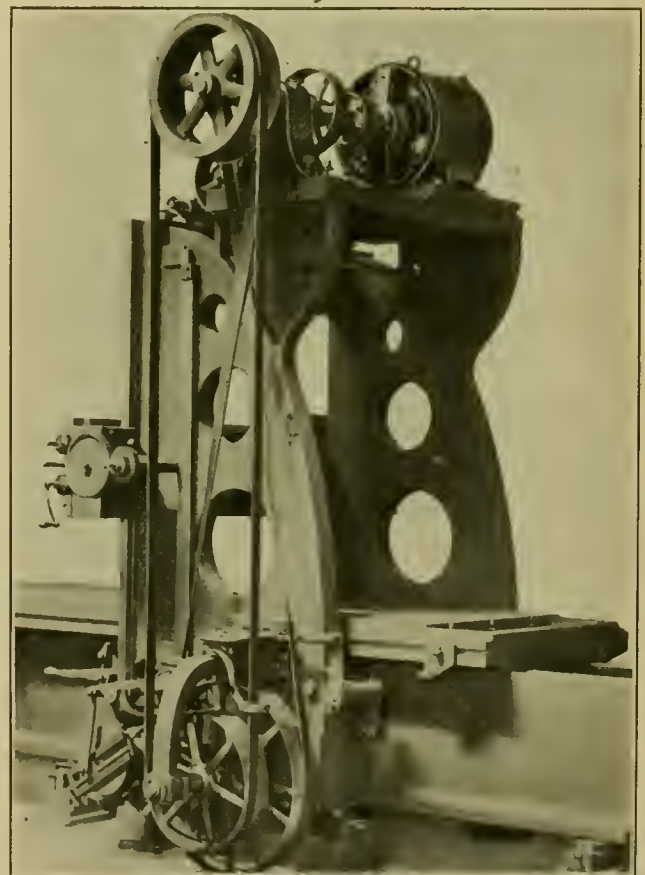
DIRECT-CONNECTED MOTOR-DRIVE UPON A GRAY PLANER, SHOWING USE OF FLYWHEEL. BULLOCK CONSTANT SPEED MOTOR.
